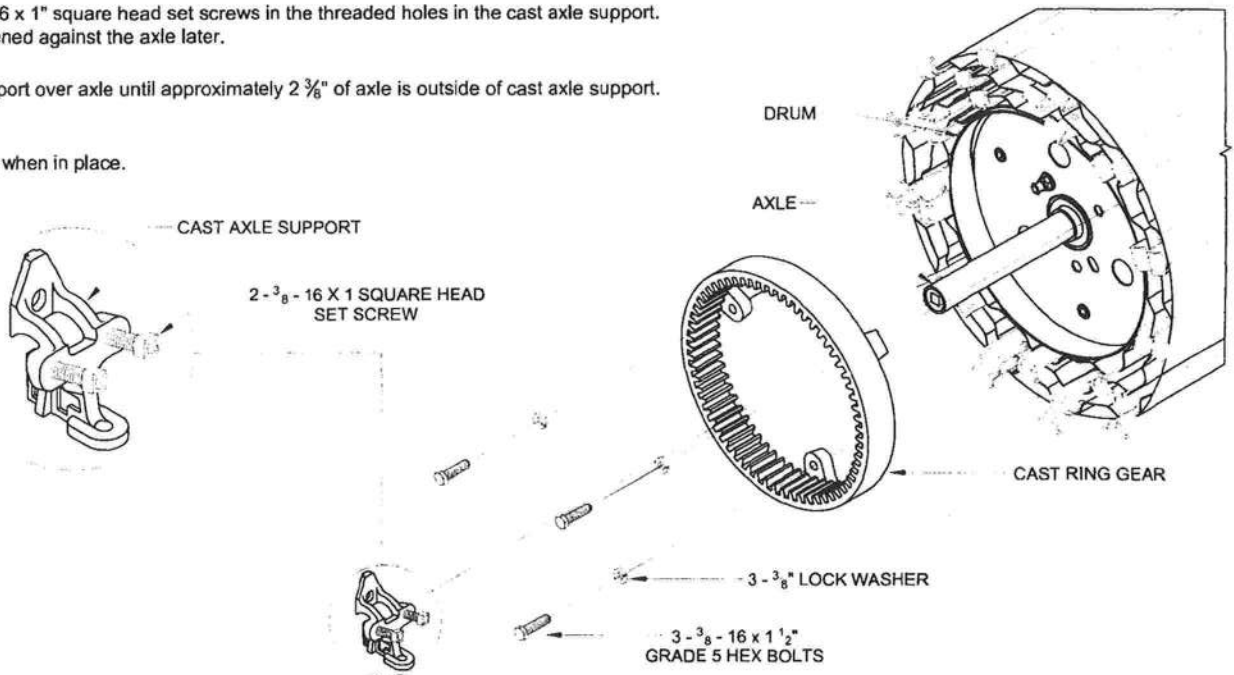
CAST AXLE SUPPORT AND CAST RING GEAR TO DRUM ASSEMBLY
